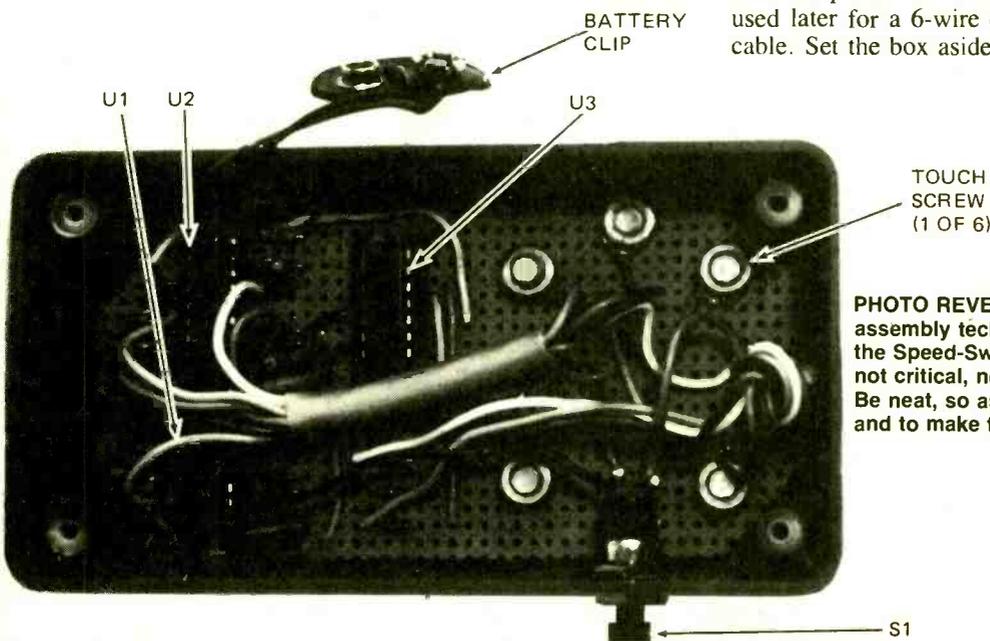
PHOTO REVEALS THAT author used a perfboard-assembly technique to assemble his version of the Speed-Switch Touch Control. Wiring is not critical, nor is placement of parts. Be neat, so as to avoid mistakes during assembly and to make the unit attractive to use.
